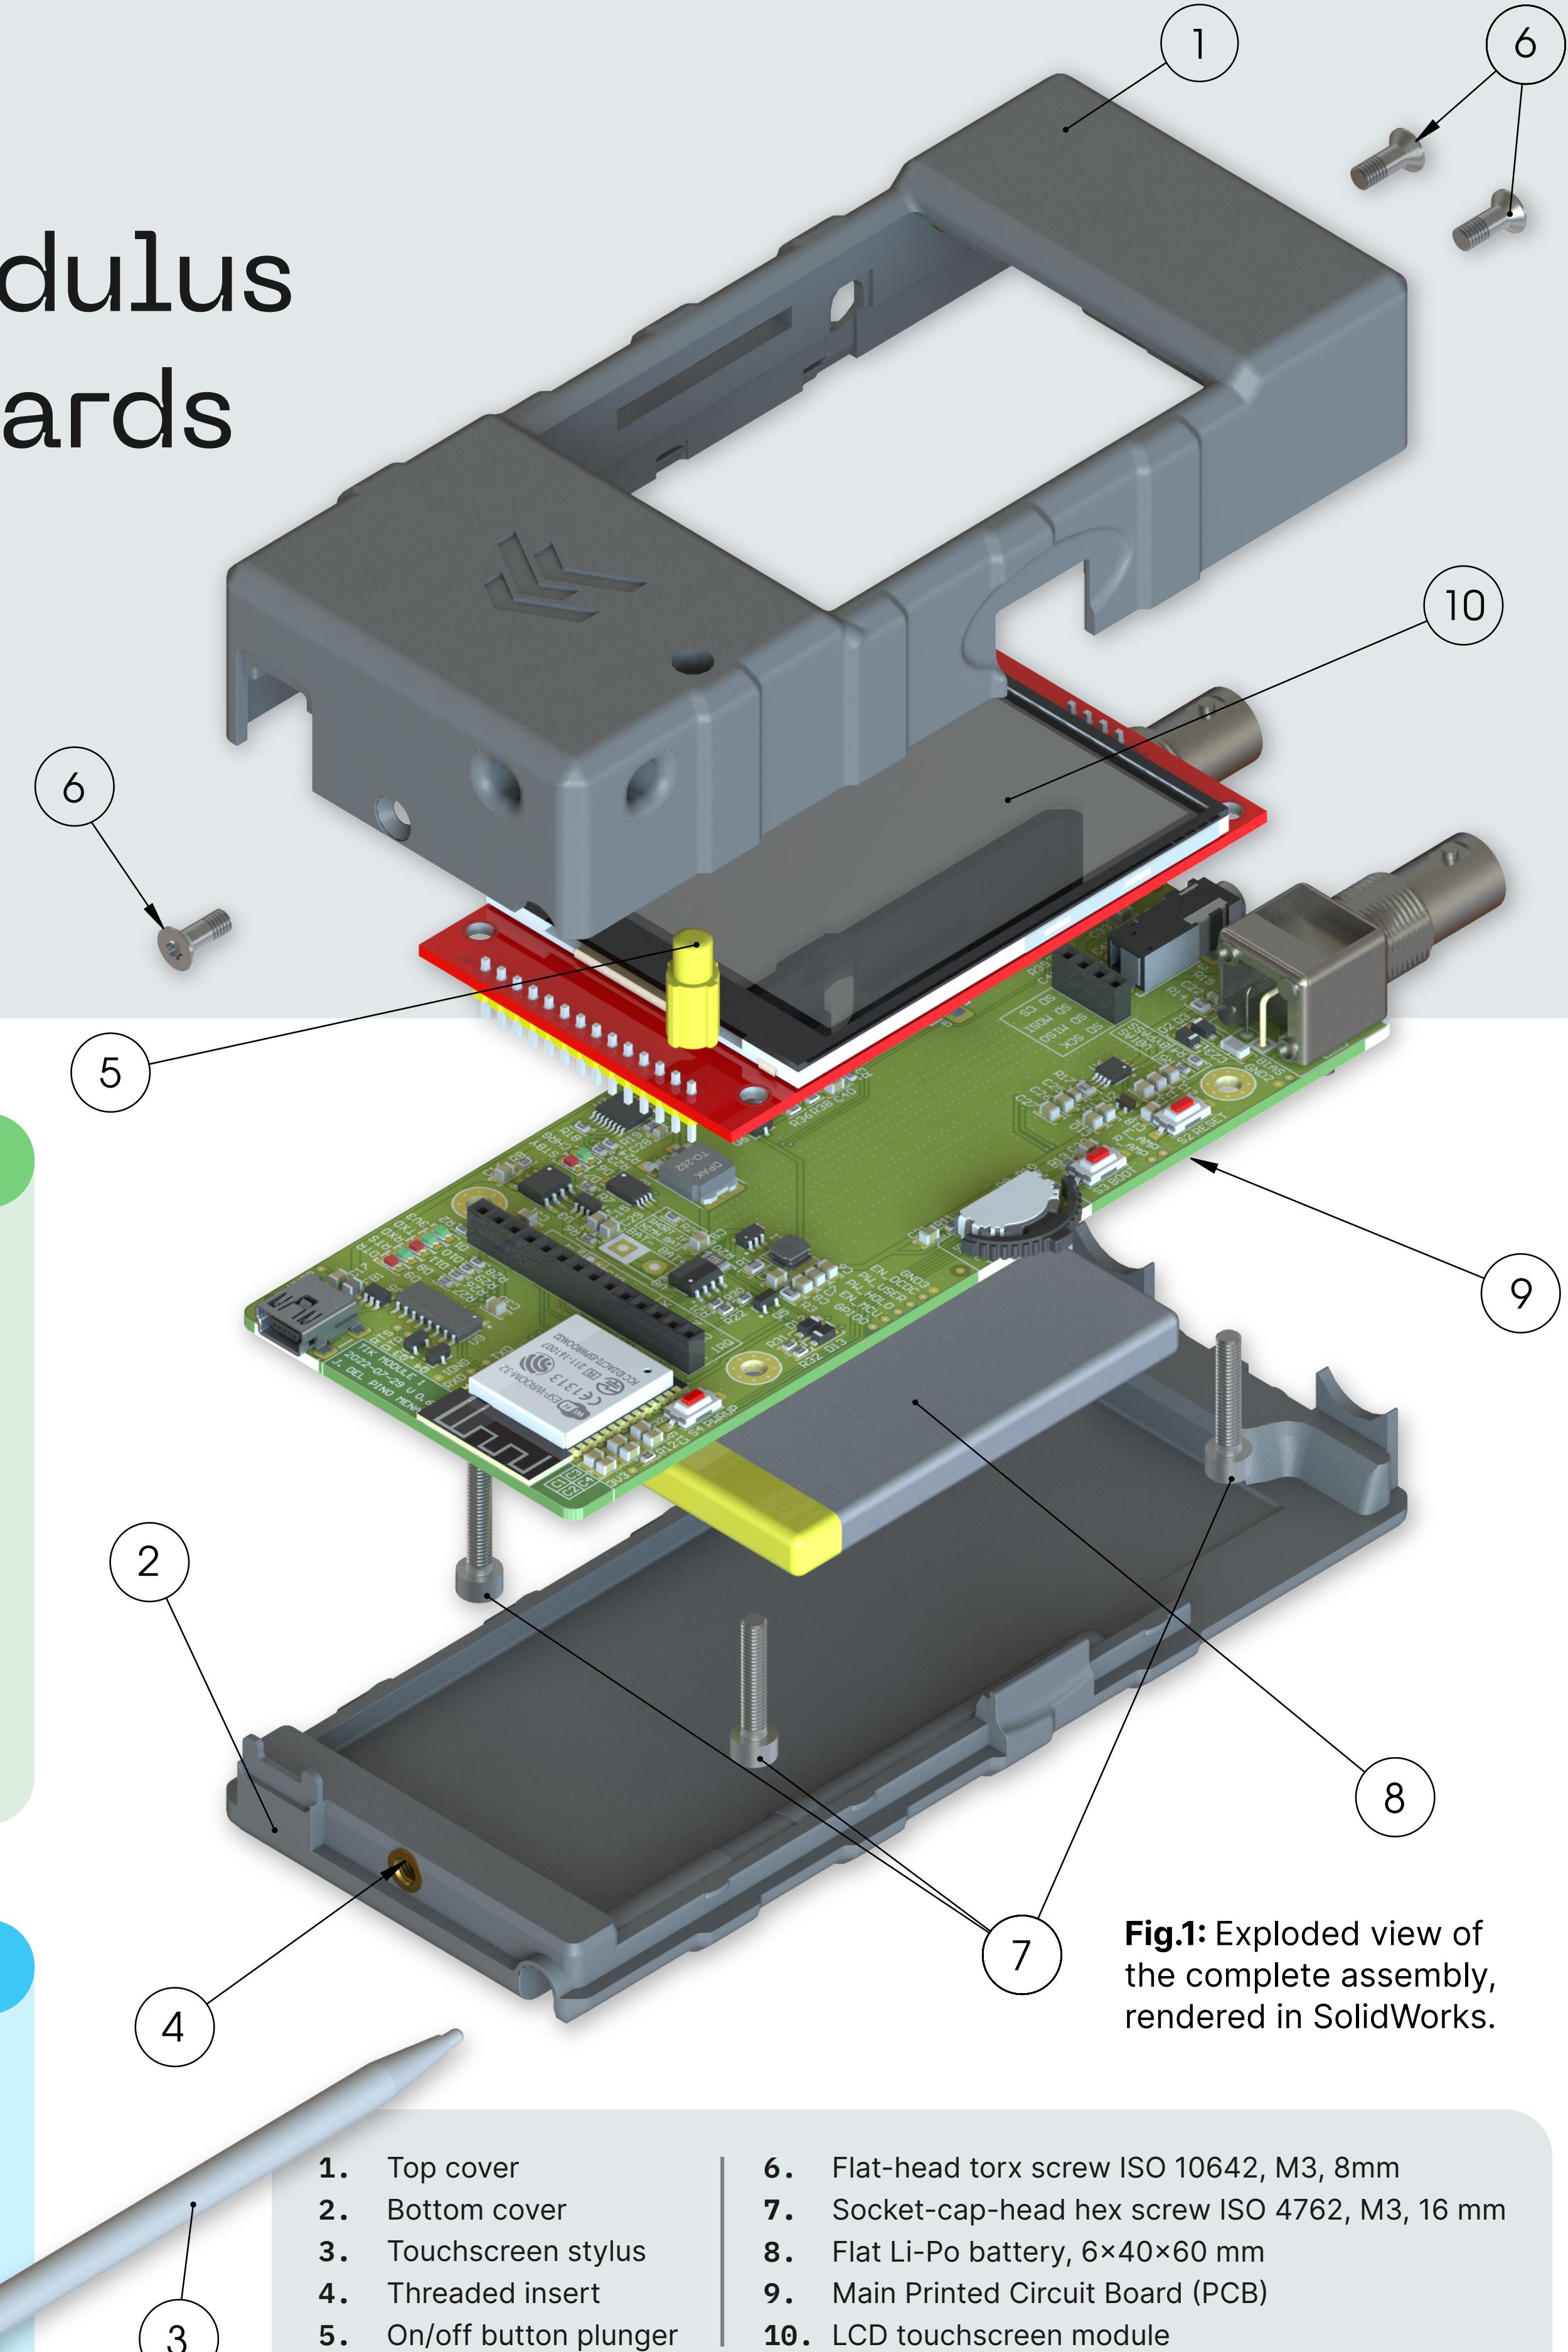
Exploded view of the complete assembly, rendered in SolidWorks.
